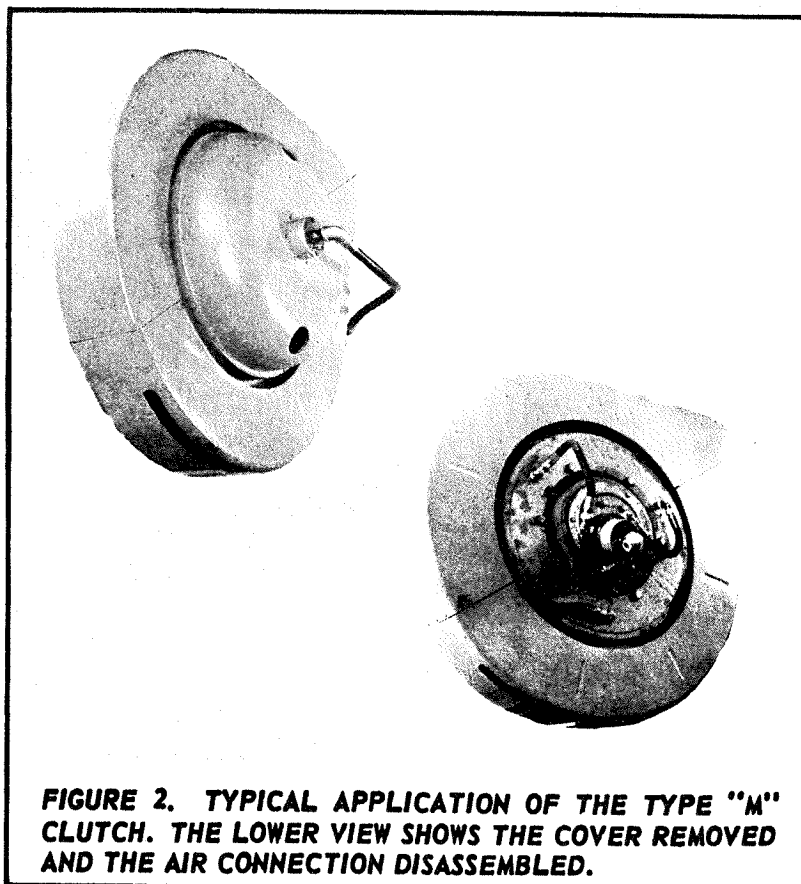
TYPICAL APPLICATION OF THE TYPE "M" CLUTCH. THE LOWER VIEW SHOWS THE COVER REMOVED AND THE AIR CONNECTION DISASSEMBLED.
